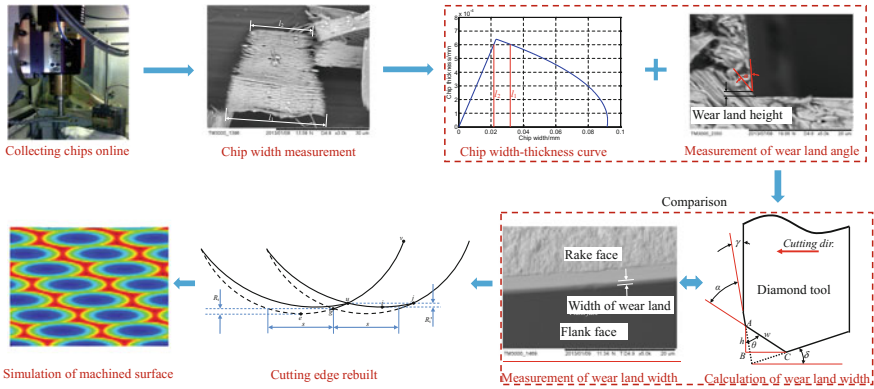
Identification procedures for tool flank wear and machined surface topography
